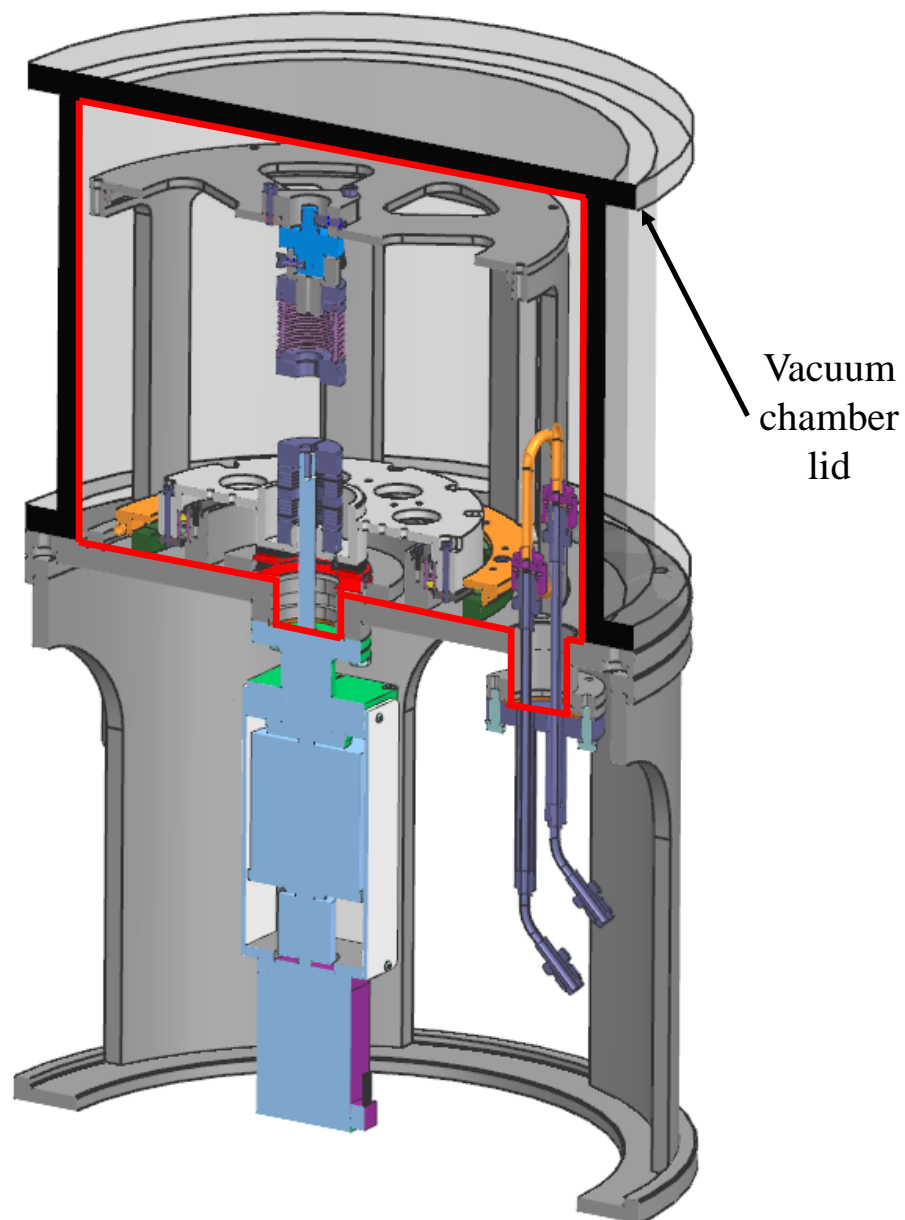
Testing rig - vacuum and atmospheric part of the rig (vacuum in red box). Shown without the Measuring assembly (3.3.4).
